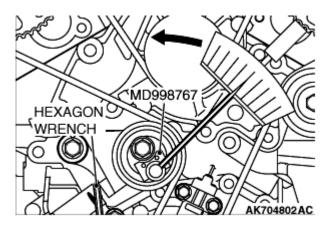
Loosening Center Bolt Of Tensioner Pulley Courtesy of MITSUBISHI MOTOR SALES OF AMERICA.
